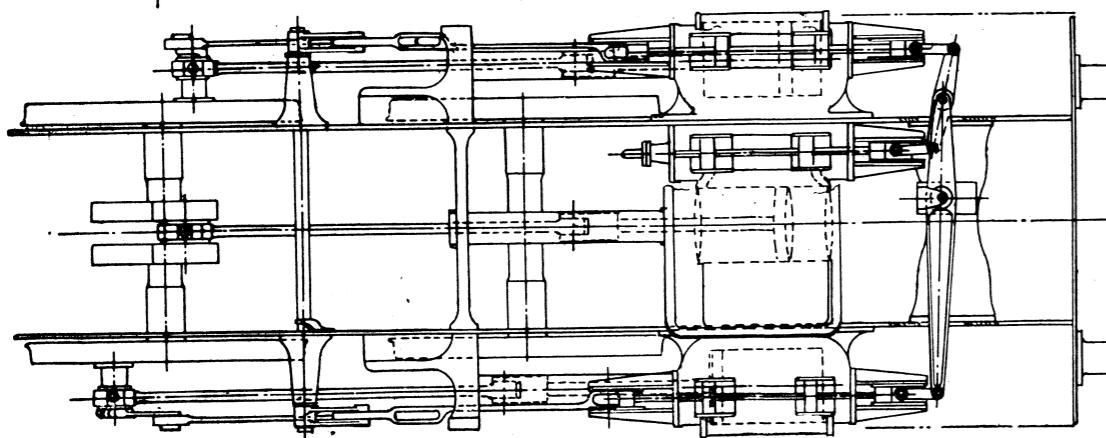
Valve Gear as used on 3-Cylinder Engines in Germany.
